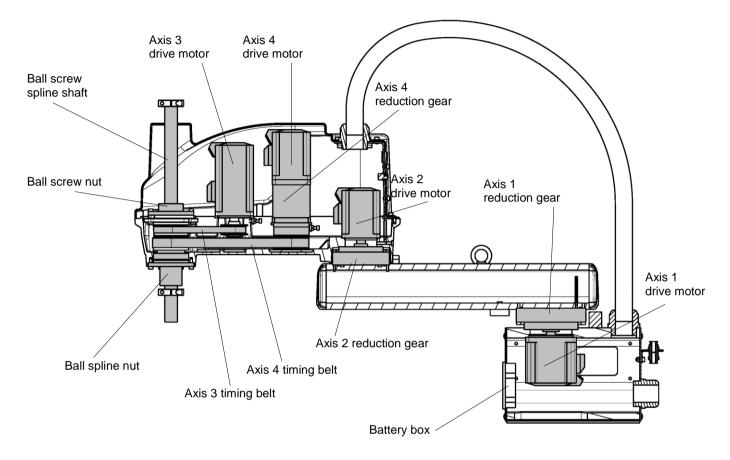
Layout of robot mechanical components (KHL-500, KHL-600, KHL-700)
